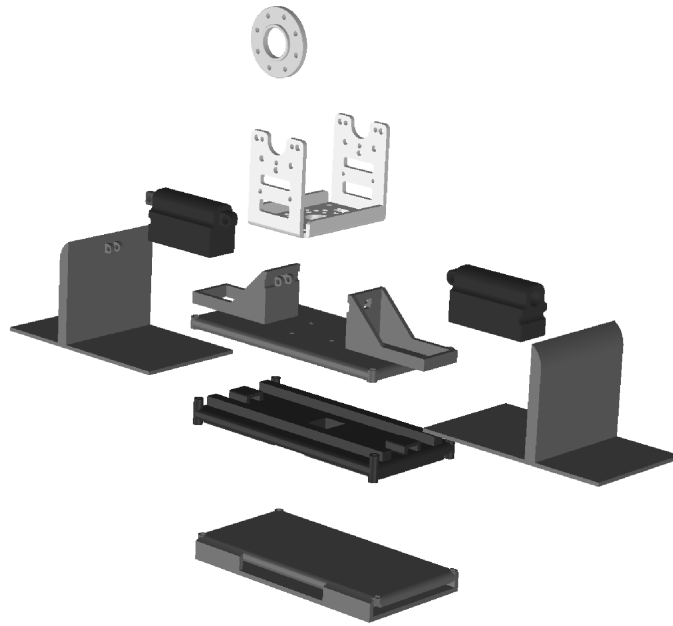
An exploded view of the foot of the Biped walker Prototype
